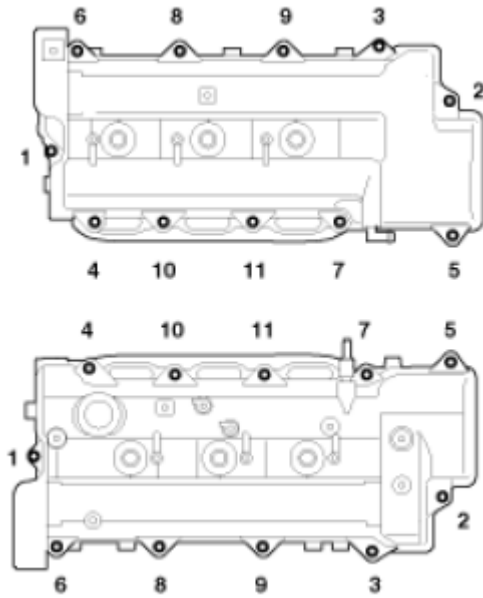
Identifying Cylinder Head Cover Bolts In Tightening Sequence
